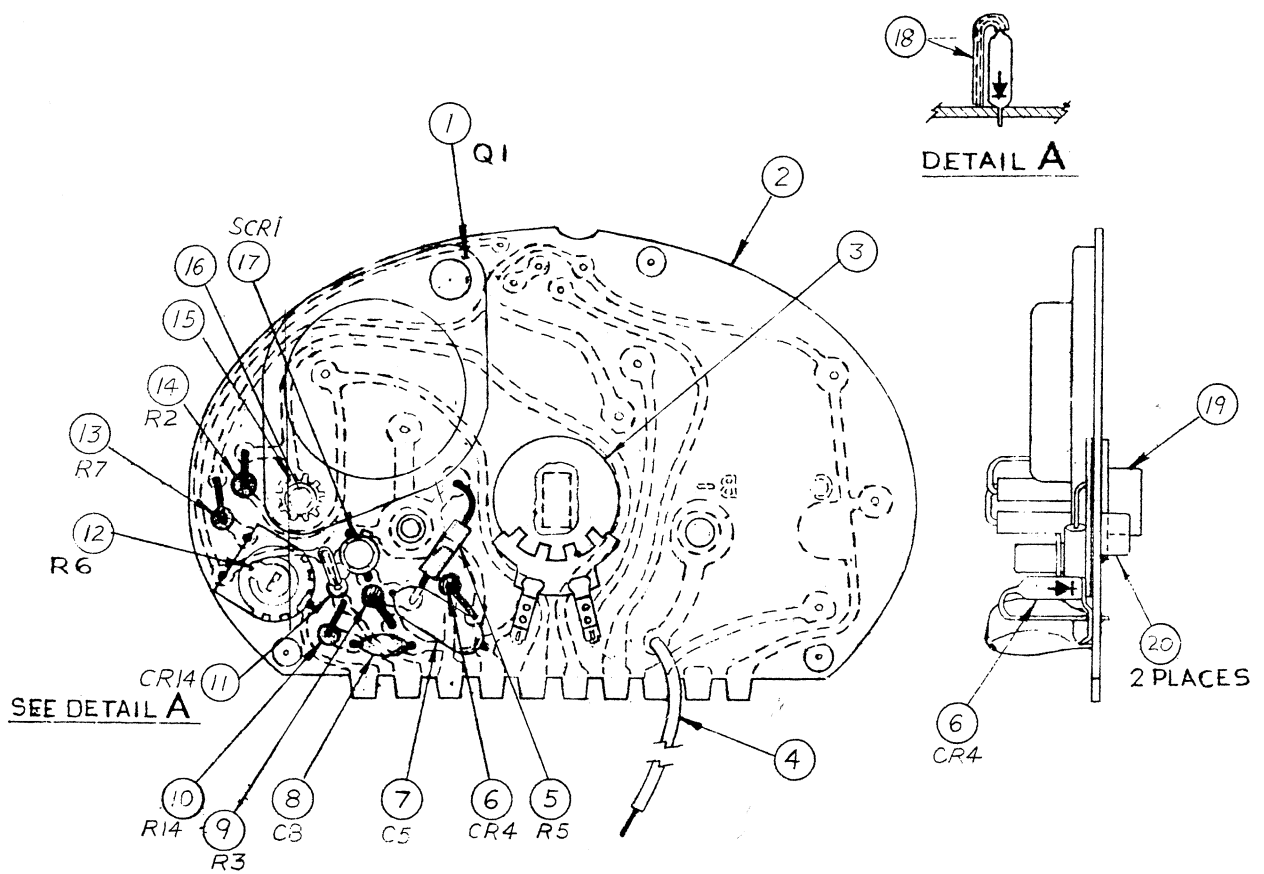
Circuit Card Number 1 Assembly (700/770)
